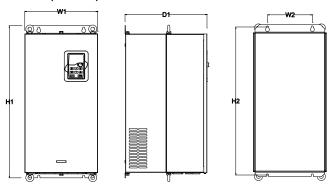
Wall installation of 660 V 22-132 kW VFDs
